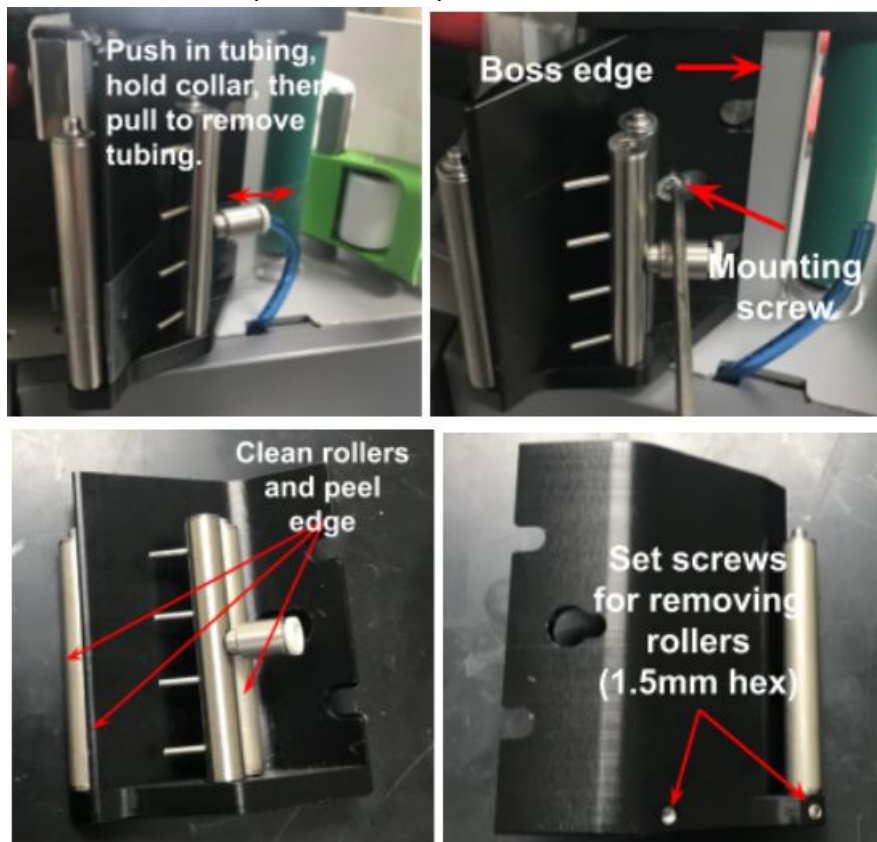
Some peel plate designs have less rollers. Please contact Sales@Scinomix.com if you would like this updated design.
